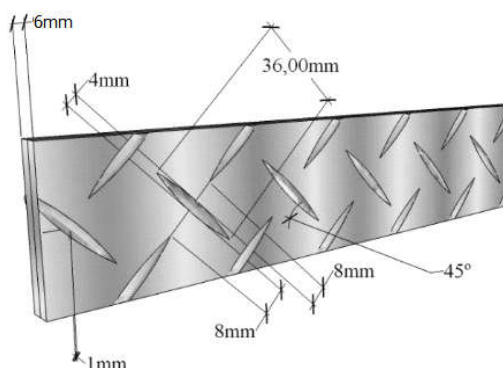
Linear connector formed by checkered plates welded “back-to-back”.
